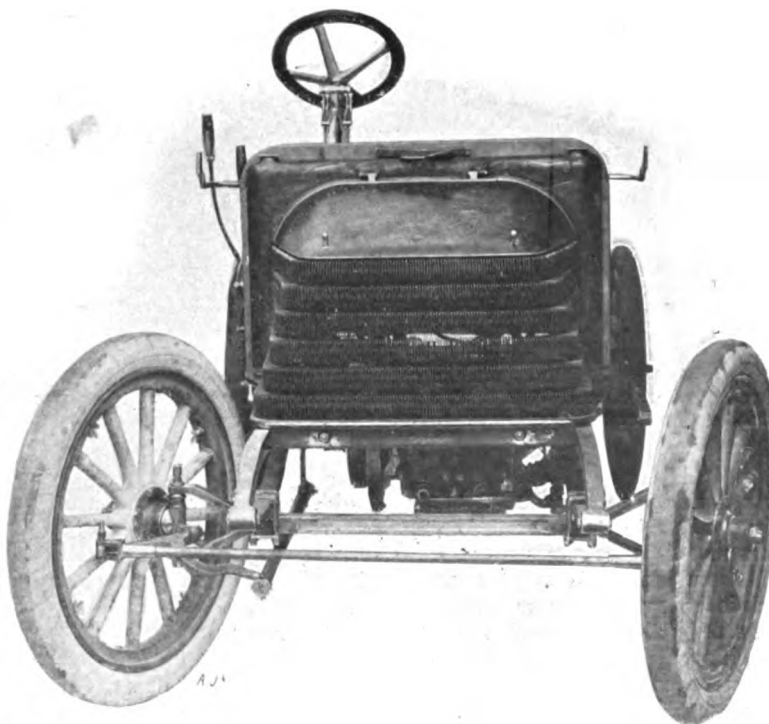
Front view of the 8-h.p. Wolseley Chassis, showing the Front Axle and the Steering-Heads, with the Wheels at "Full Lock."
